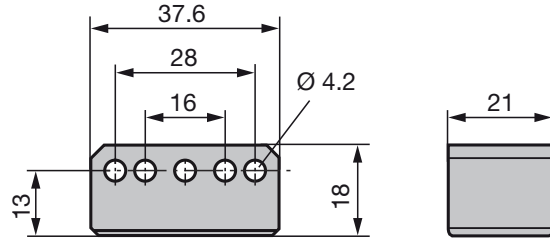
Installation dimensions of BTL6-A-3801-2 magnet
